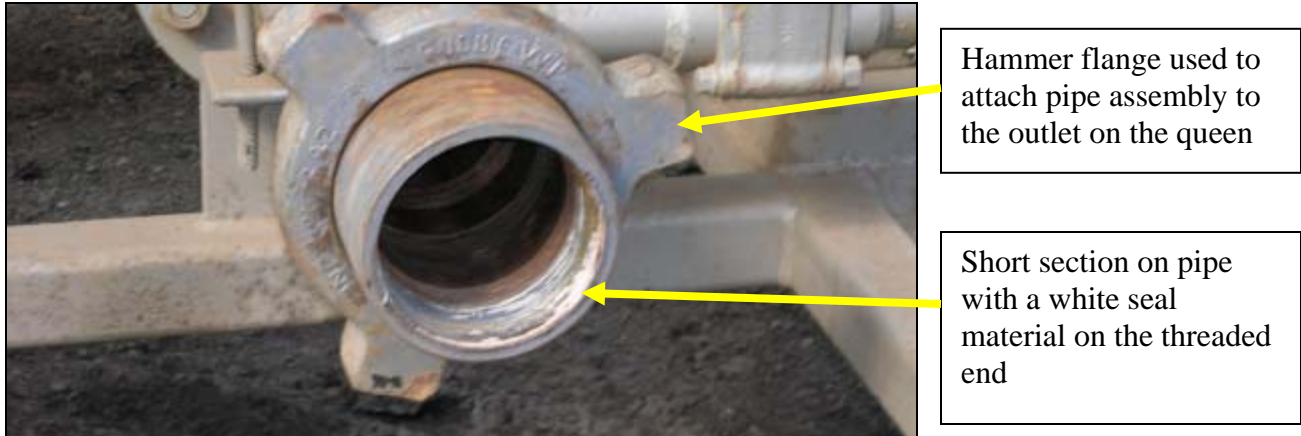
The first connection of the pipe assembly. A short (8-inch) section of pipe was attached to the outlet on the queen with a hammer flange.
